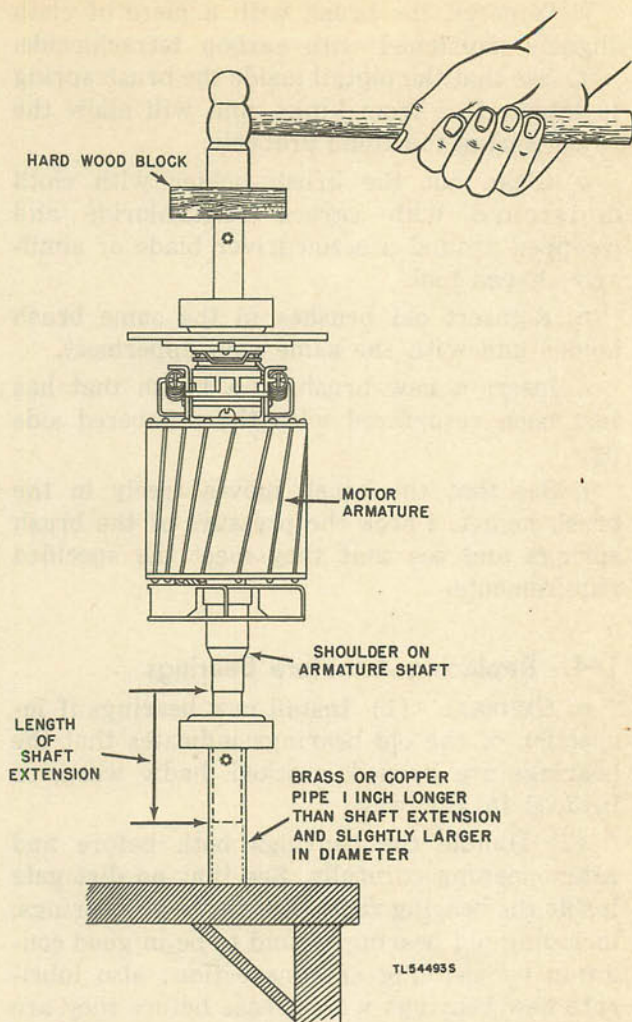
Mounting bearings on the armature shaft by use of hammer and soft metal pipe.
